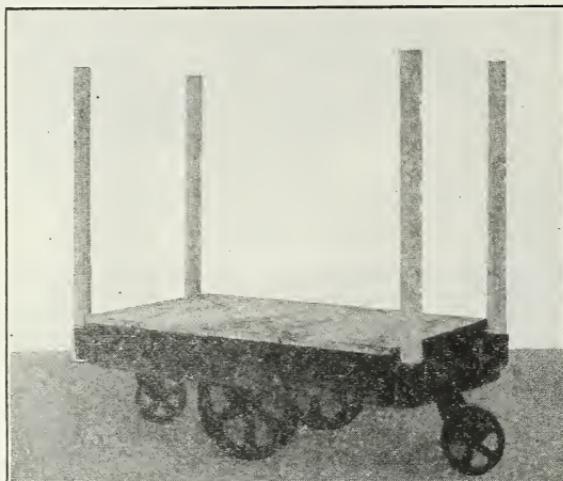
Factory trucks are essential equipment of a modern dimension-stock plant.
